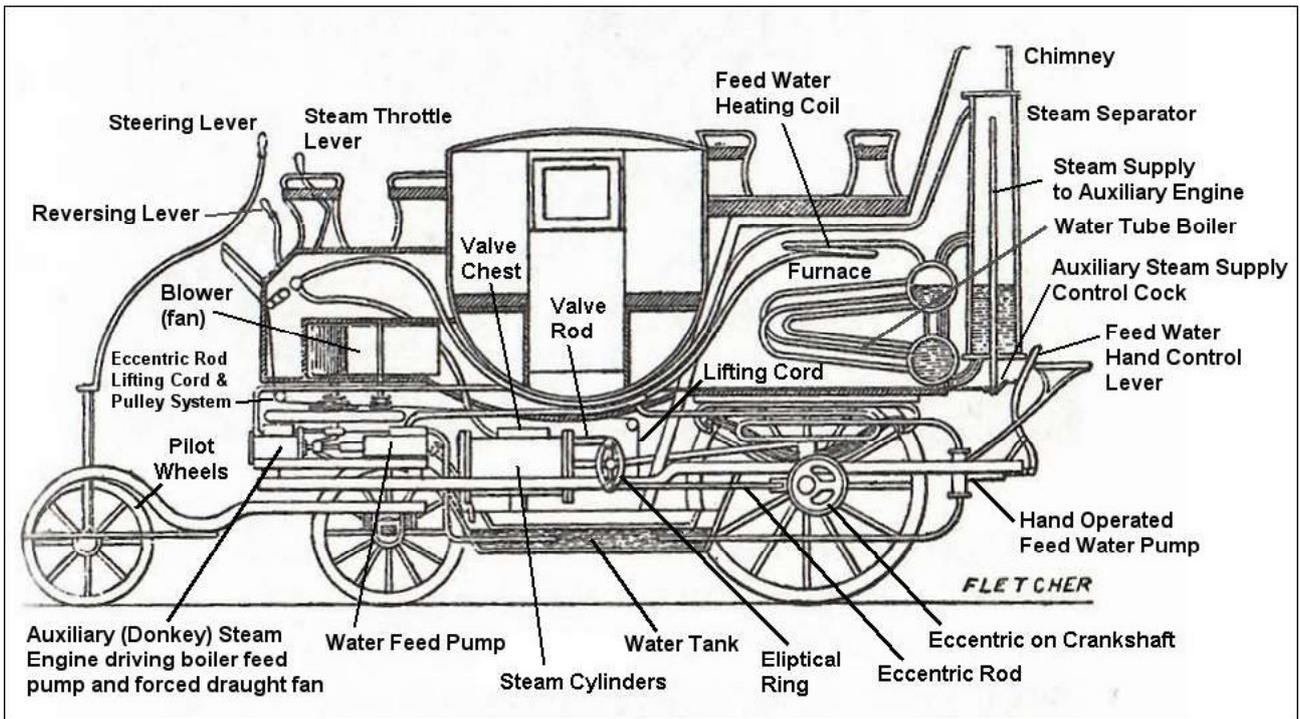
Gurney's coach of 1828 showing the reversing lever and elliptical ring (each cylinder has its own elliptical ring) valve gear positioned at the *rearward* end of the cylinders. The single reversing lever lifts the eccentric rod of each cylinder by a cord and pulley system, Fletcher reference 7 with added text.
